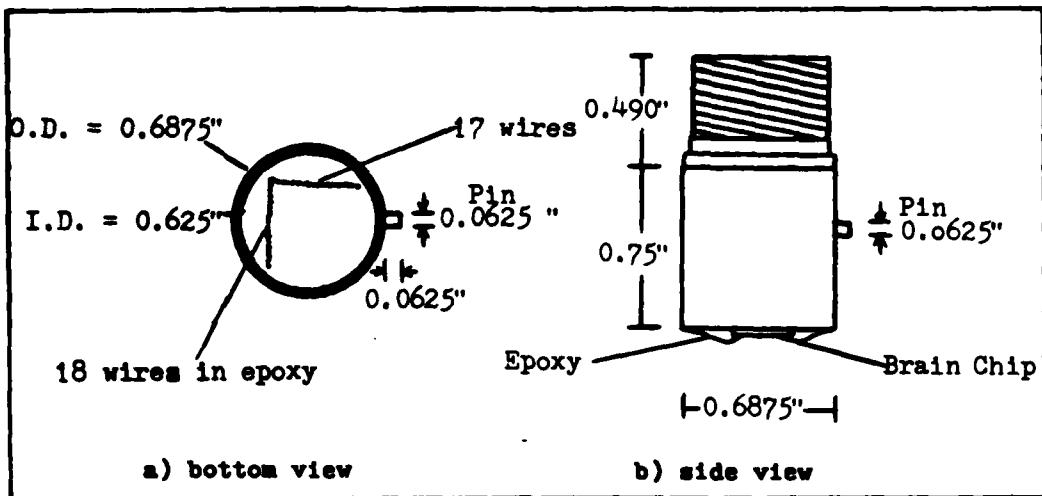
Brain Chip Package Inner Cylinder (Implantable Package)
